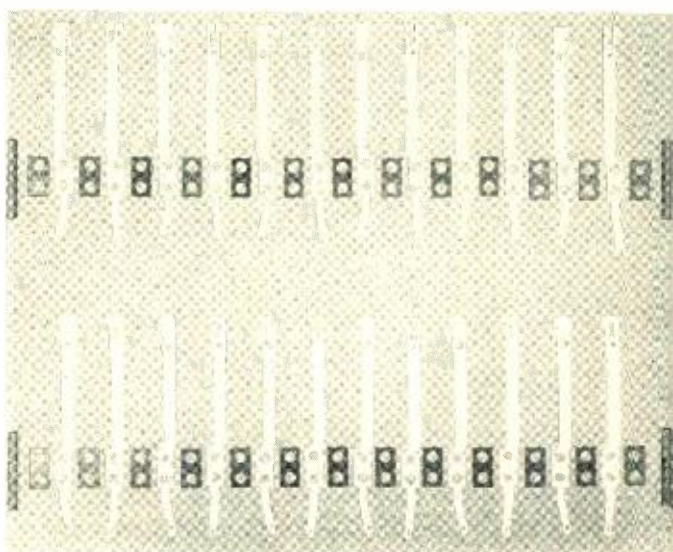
Comparison of the molded wire assemblies for 12 make contacts with the corresponding parts used on the U-type relay.
